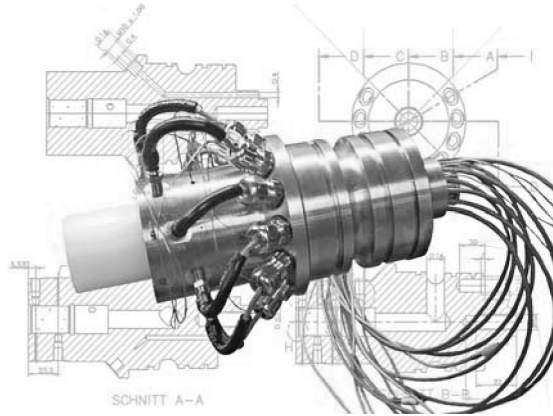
Cylinder block with implemented pressure sensors and thermocouples
